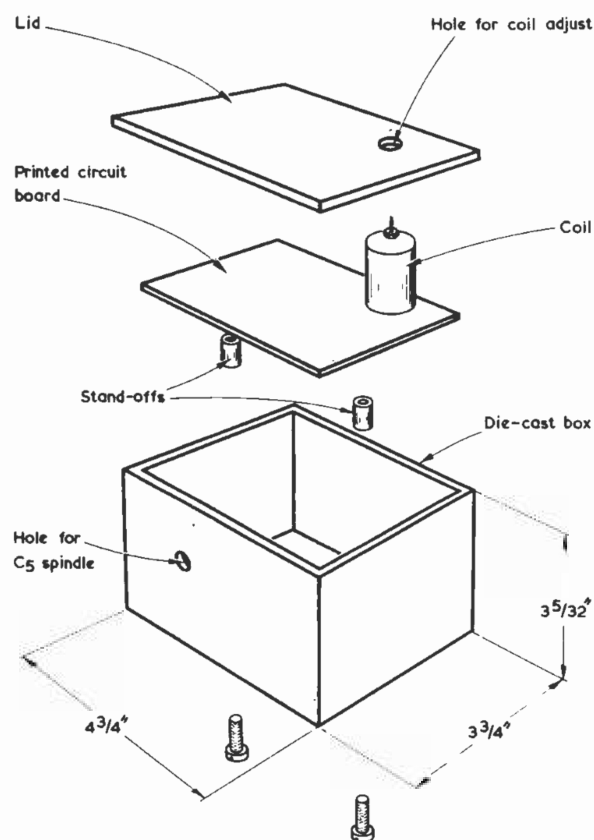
How the v.f.o. printed circuit board is fitted in the die-cast box
